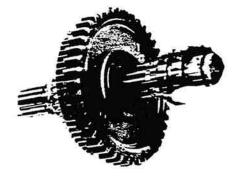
Removing 1st Reverse Sliding Clutch.
